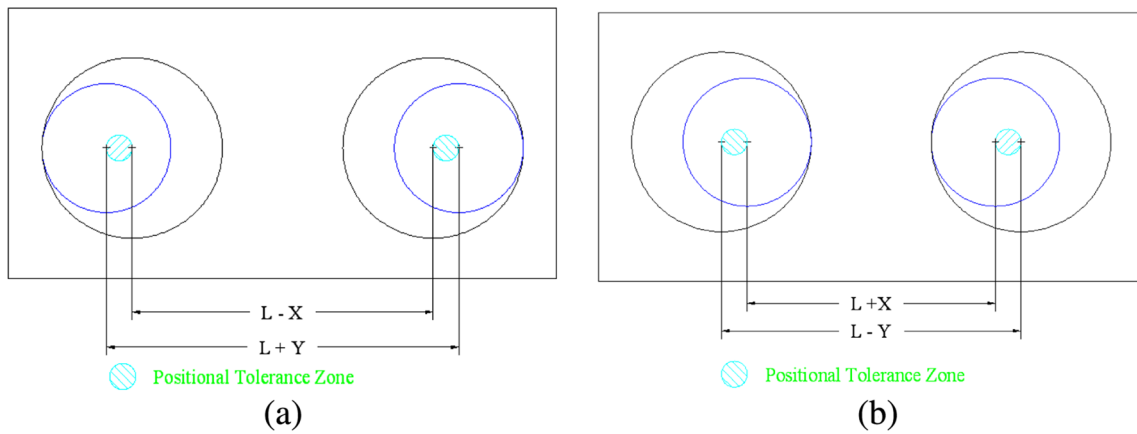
a, b Two extremes of tolerance zone in a linear assembly
